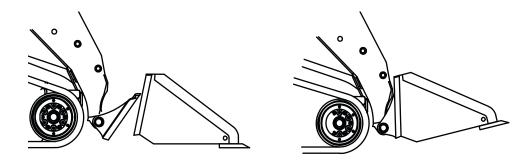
A QUICK ATTACH MECHANISM LOCKED TO ATTACHMENT
